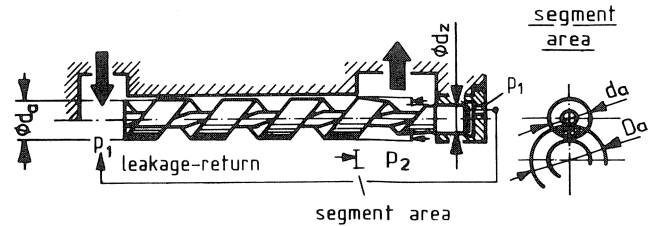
Hydraulic Balancing of Idler Screw (Principle).
